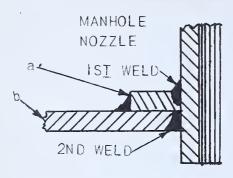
Welding Locations for Manhole Nozzle
